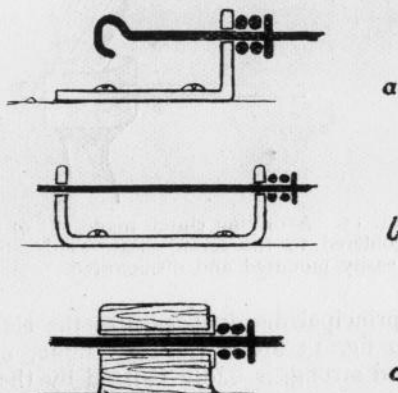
A. A simple form of bearing. FIG. 14B. A simple form of double bearing bent out of a piece of strip. FIG. 14C. A long plain bearing which gives very good results.
